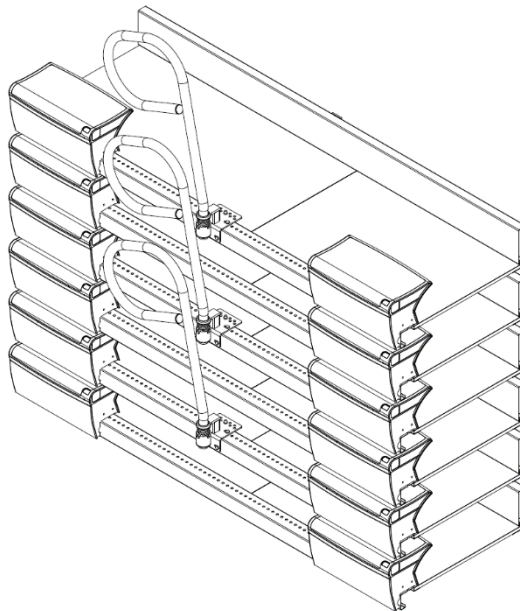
Stub Deck Support Connection to Rear Beam
